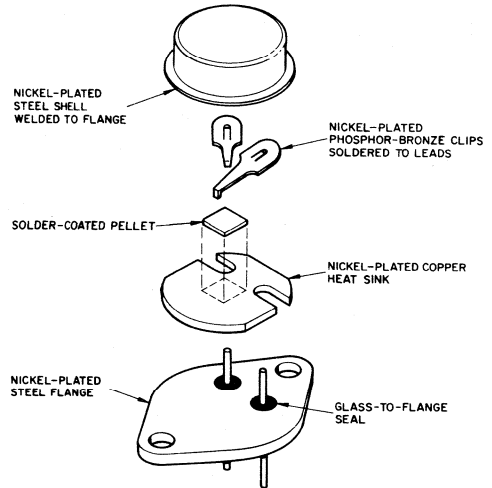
shows the RCA steel TO-3 package. Note the glass-to-stem seal with no solder interface. This configuration is possible with the steel package because the melting point of steel is far higher than the melting point of glass. It is not possible to use the same system with the aluminum
